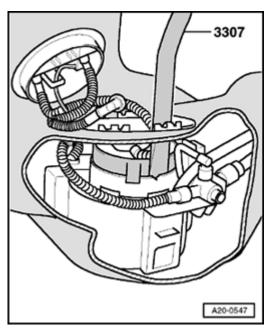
Turning Fuel Pump (FP) Using Fuel Pump Wrench 3307 Courtesy of VOLKSWAGEN UNITED STATES, INC.
